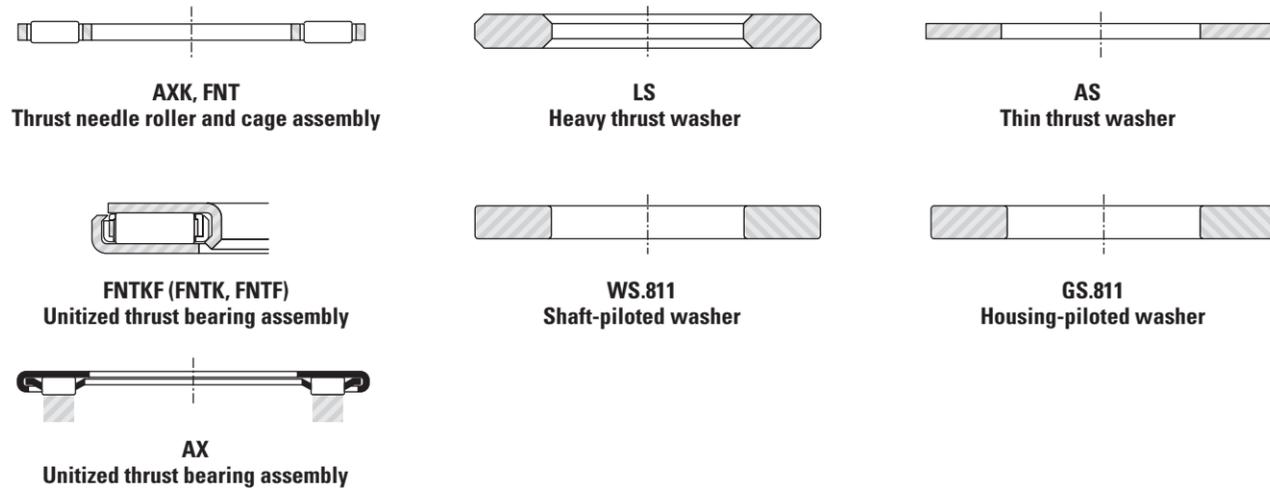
Types of metric series thrust needle roller and cage assemblies and thrust washers
